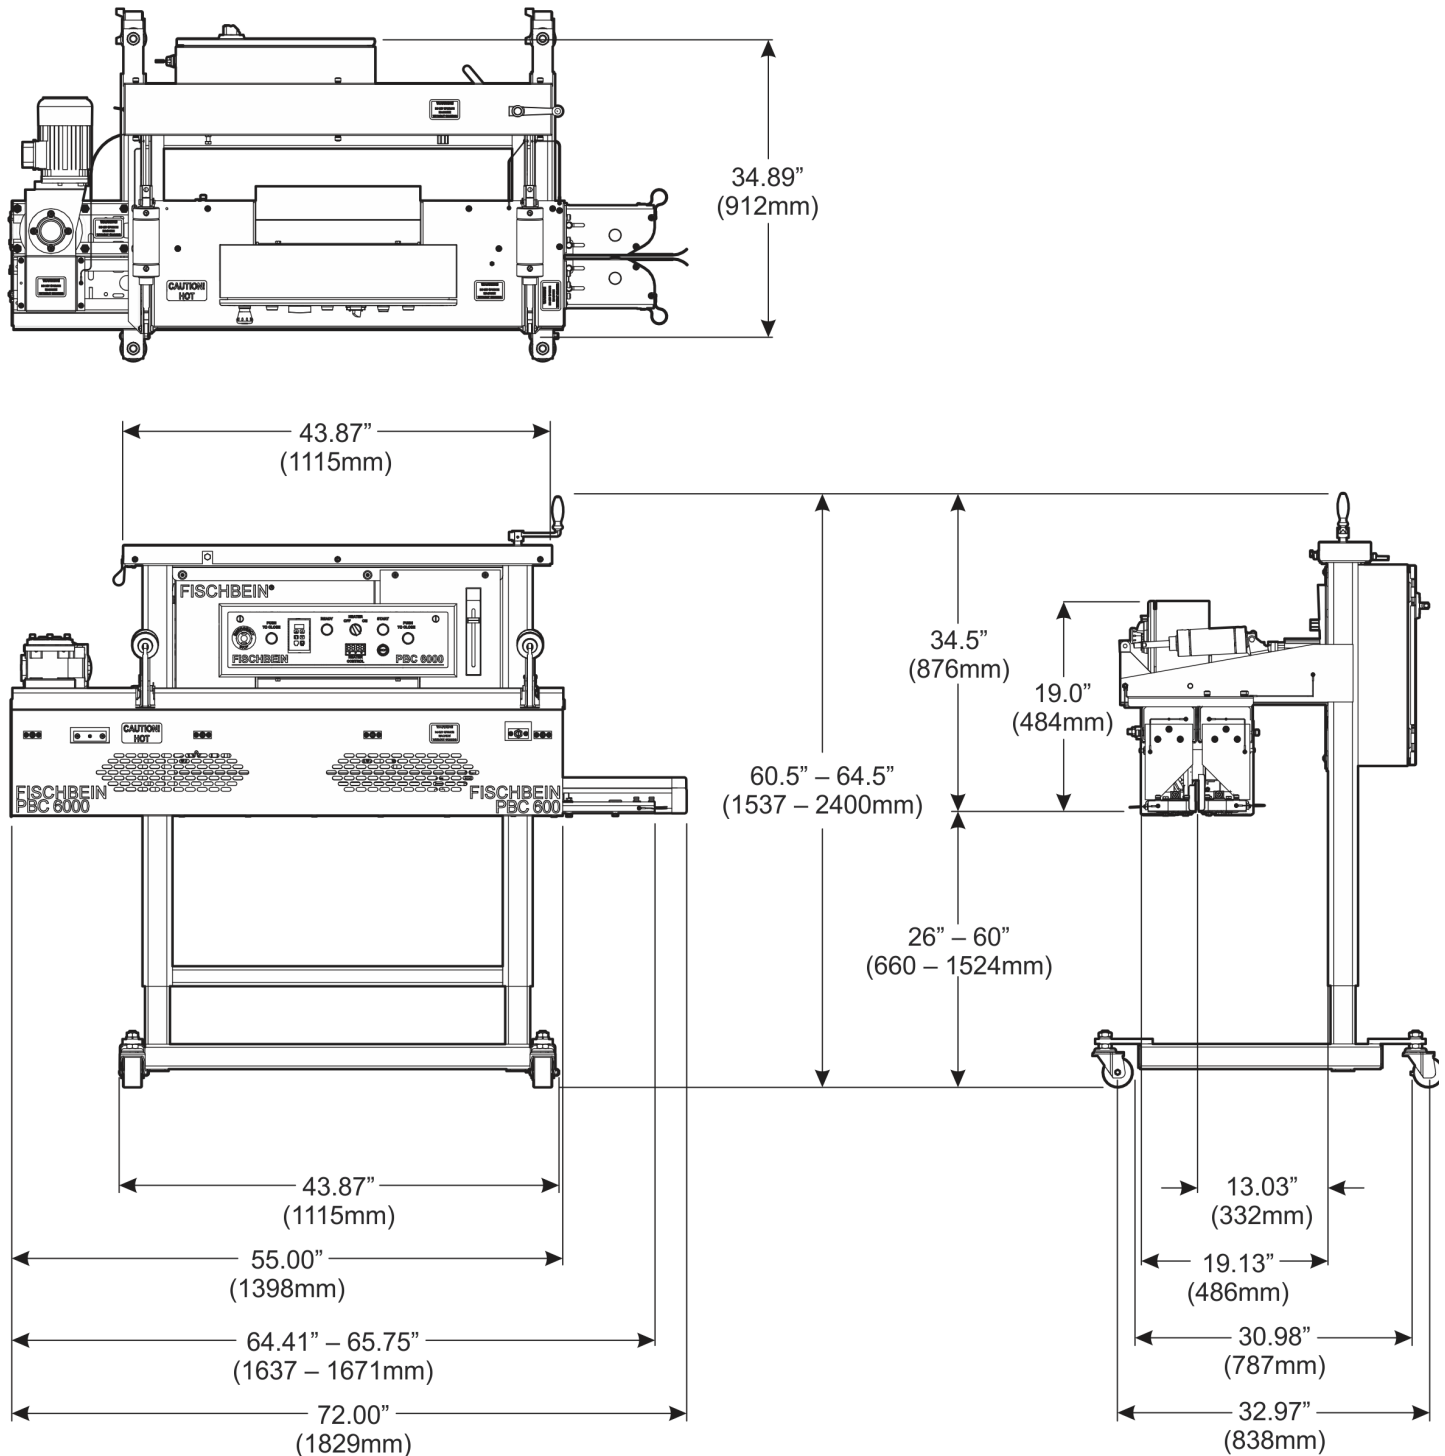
PBC6000 Right-to-Left Standard Pinch Bag Closer Dimensions
